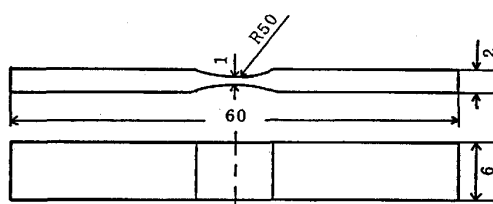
Shape of tensile test specimen (Size unit, mm).
